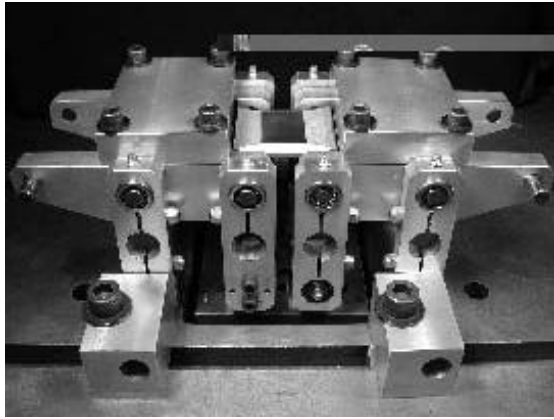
Photo of LPB FSW fatigue specimen in 4-point bend fatigue fixture. The LPB zone is evident as the central region of improved surface finish.
